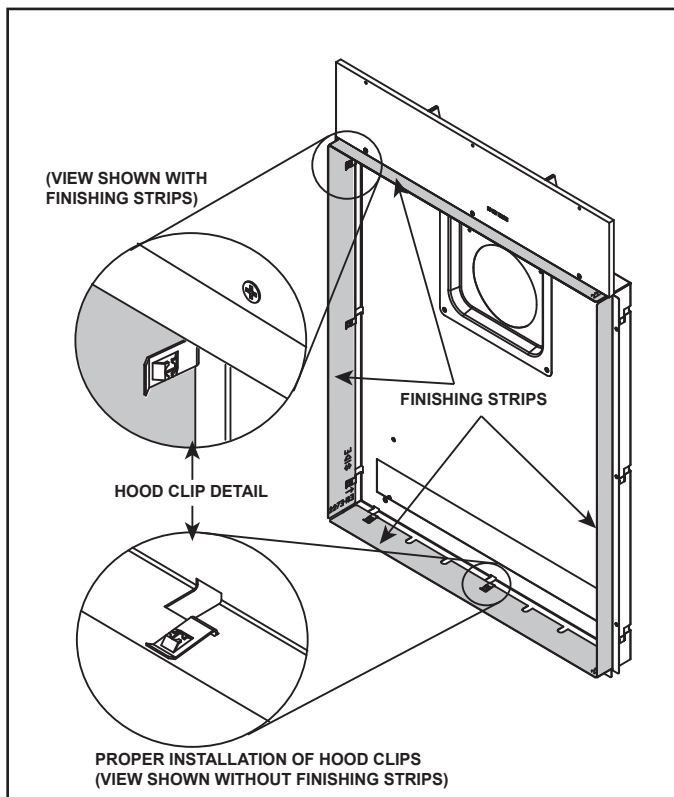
Finishing Strip Attachment & Proper Hood Clip Installation
